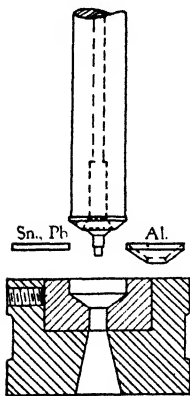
A typical collapsible tube die and the outline of blanks used in it.
